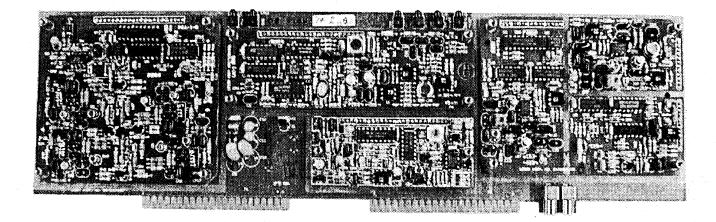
P/N 8076060095 Revision A Synthesizer Module Assembly (Old Revision)
